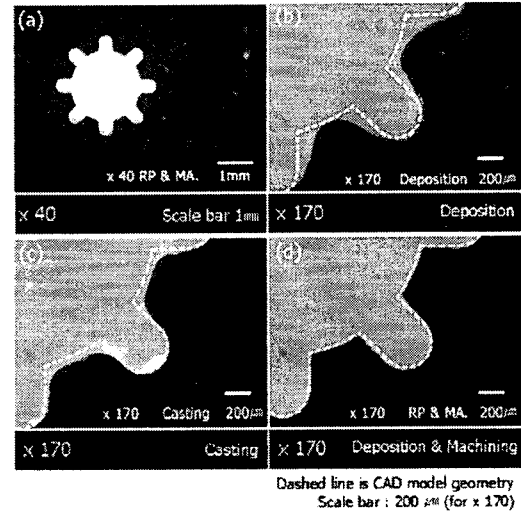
Fabricated micro gear using different process (a) micro gear ($\phi 2.9\text{mm}$), (b) deposition, (c) casting, (d) deposition and machining.
